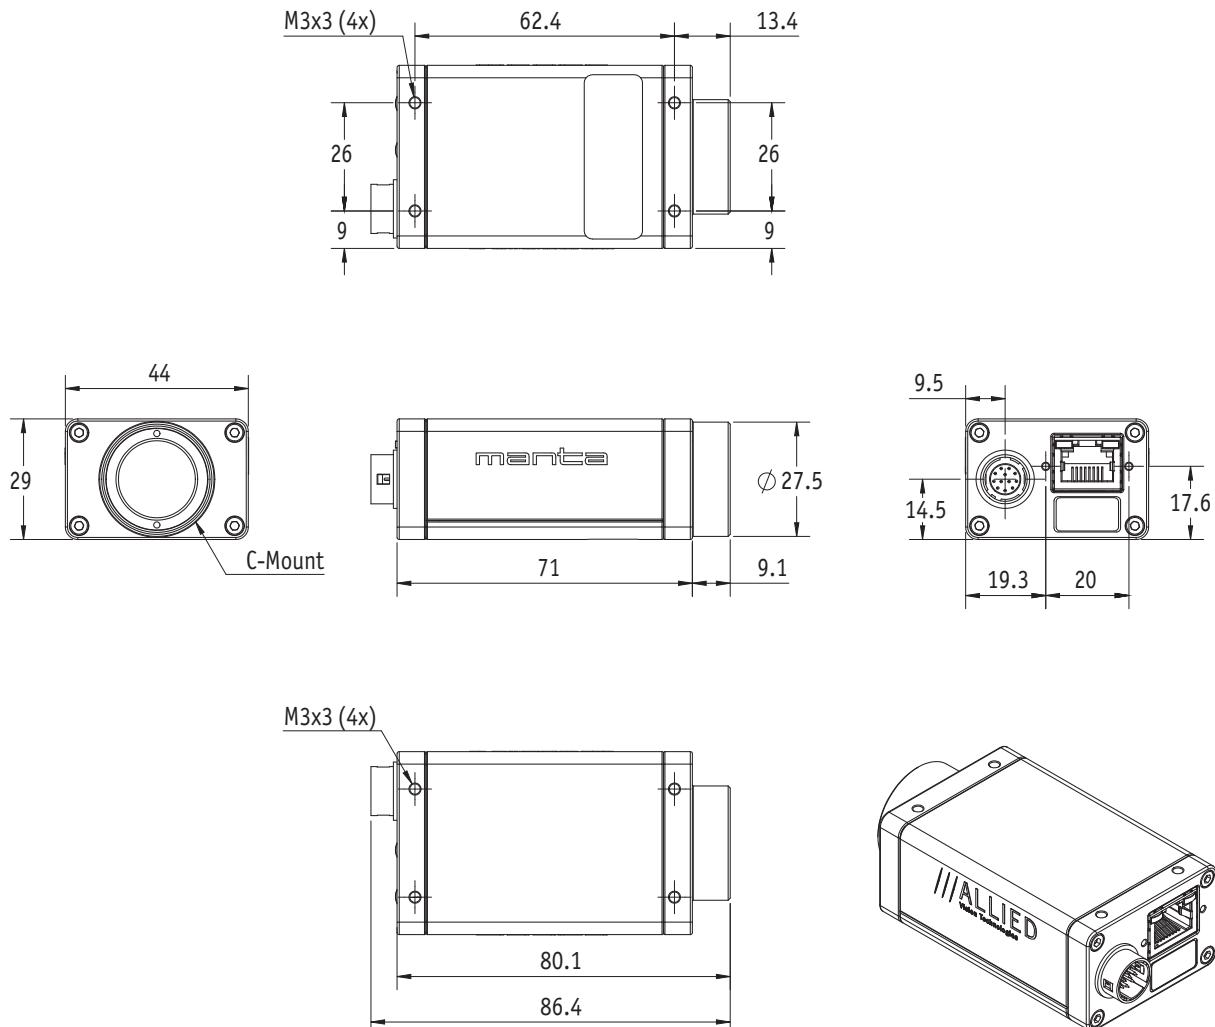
Camera dimensions type B cameras: Manta G-223 / 235 / 282 / 283 / 419 / 505 / 609 / 917
